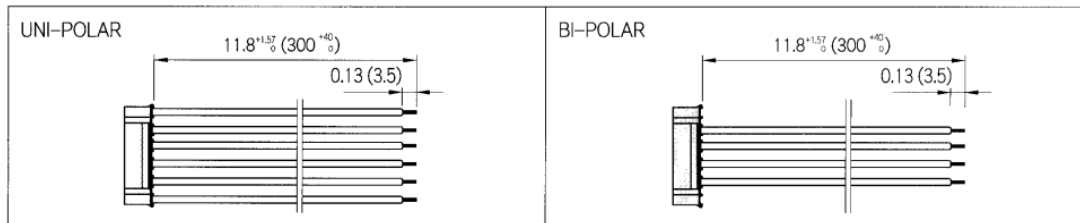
Unipolar and bi-polar connection cable to motor diagram of KH42HM2B017 stepper motor. [53]
